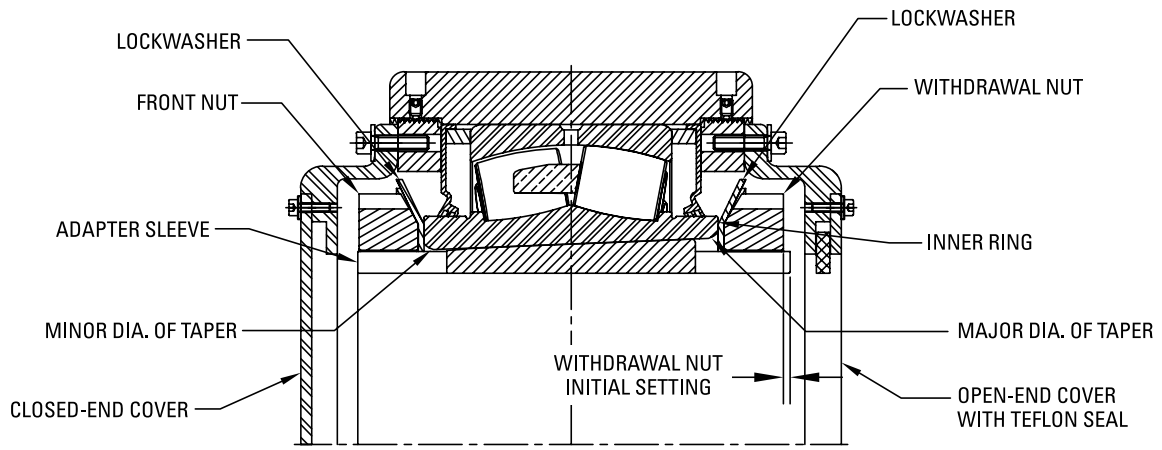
Cross-sectional view of bearing sizes 23132K to 23140K
